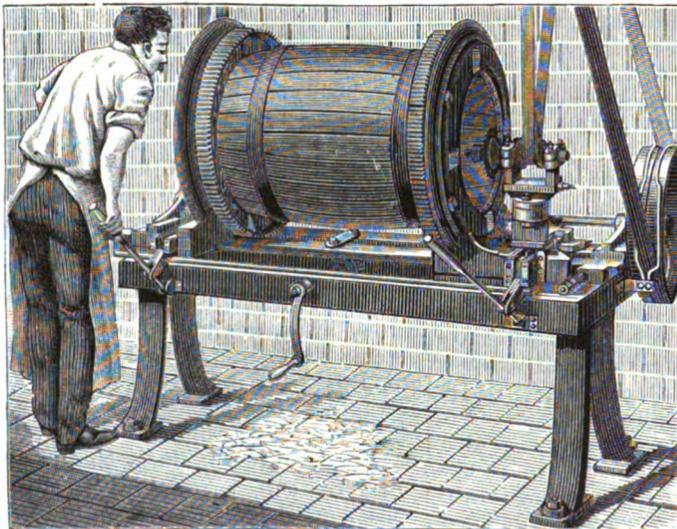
CROZING AND CHAMFERING MACHINE.
